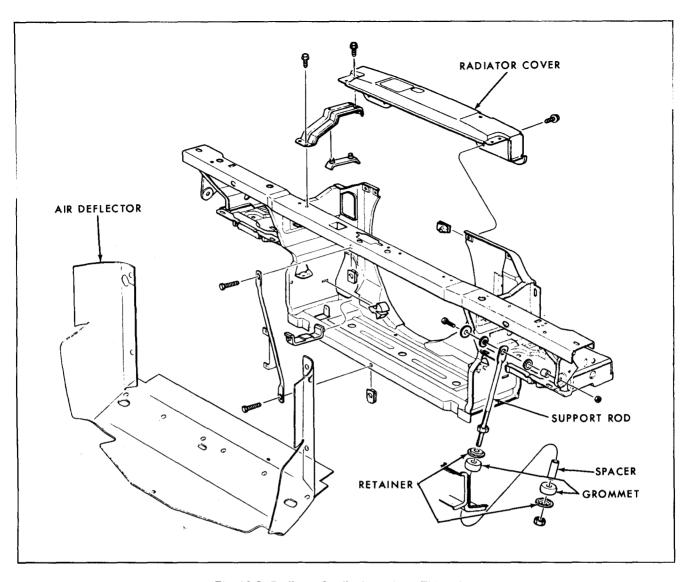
Radiator Cradle Assembly-Eldorado
